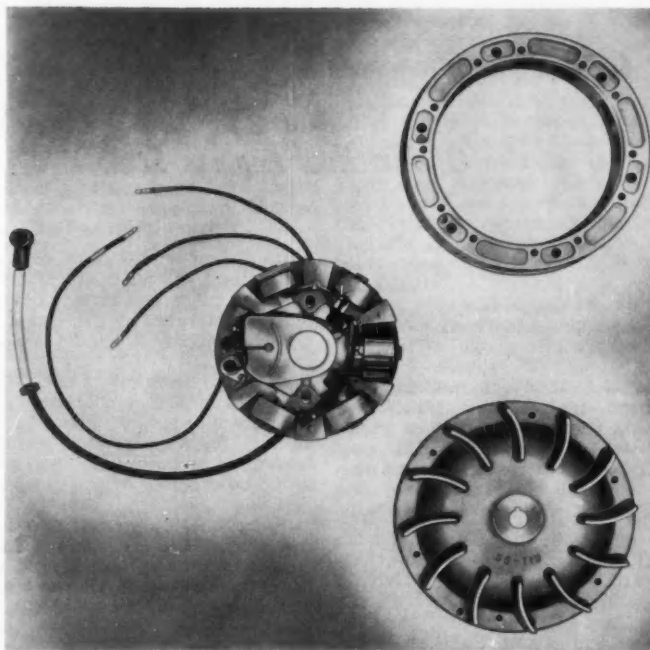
Motor scooter flywheel alternator. The rotor ring contains six magnets and is bolted to the finned, cast iron flywheel. The stator provides separate circuits for magneto ignition, headlight, stoplight, and taillight. A shunt on the taillight circuit protects the light.
